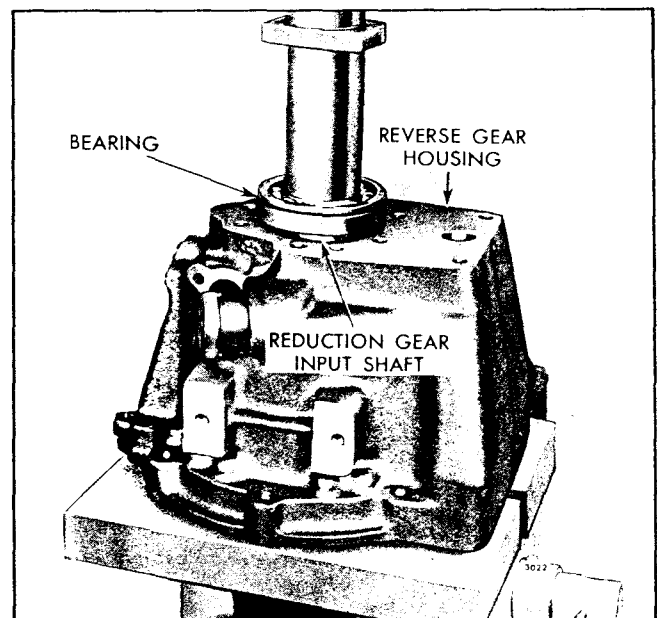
Installing Reduction Gear Input Shaft Bearing on Input Shaft and in Gear Housing (2.5:1 and 3:1 Ratios)
